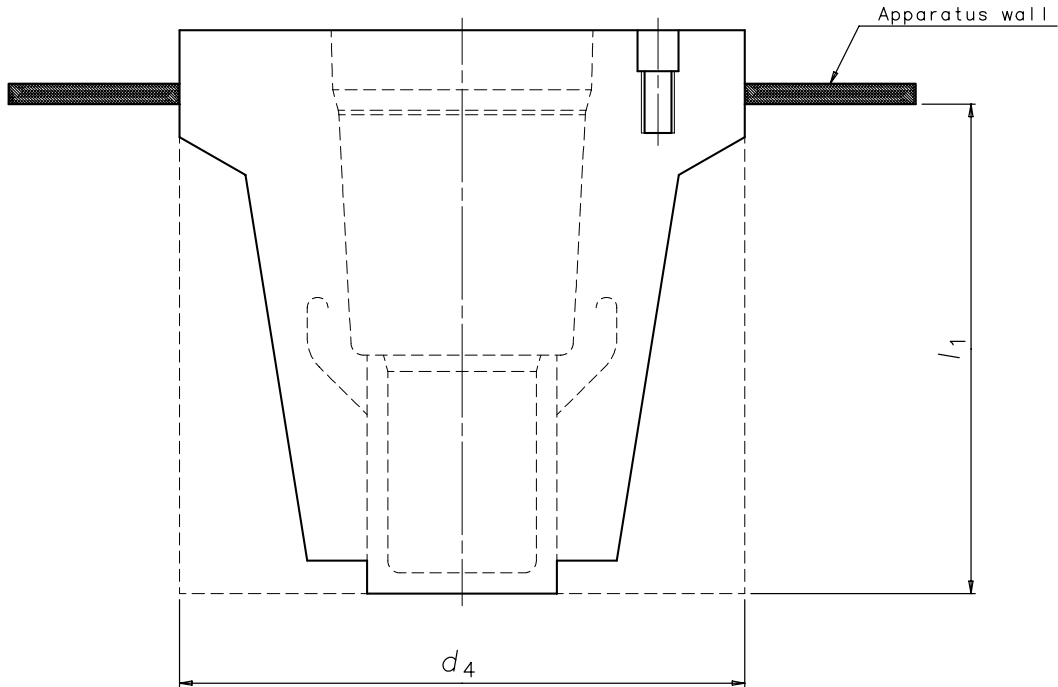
Outer dimensions of inside cone plug-in type bushings
